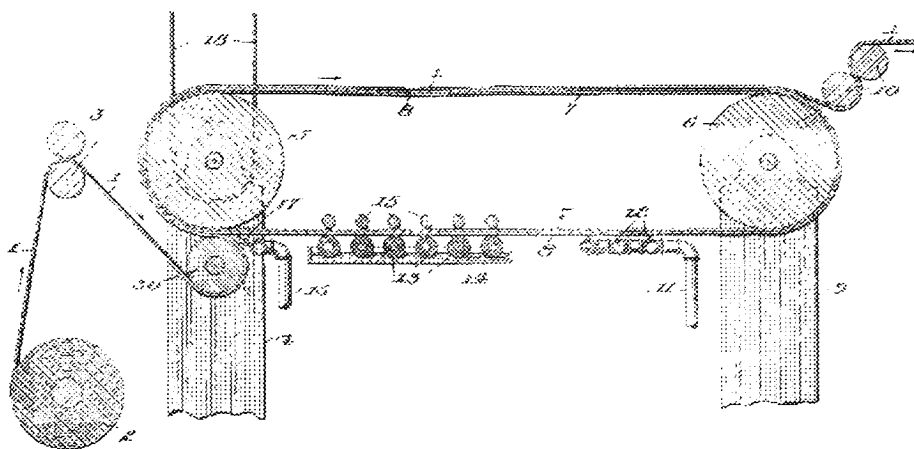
1925 FLEXIBLE FORM PRINTING MACHINE
